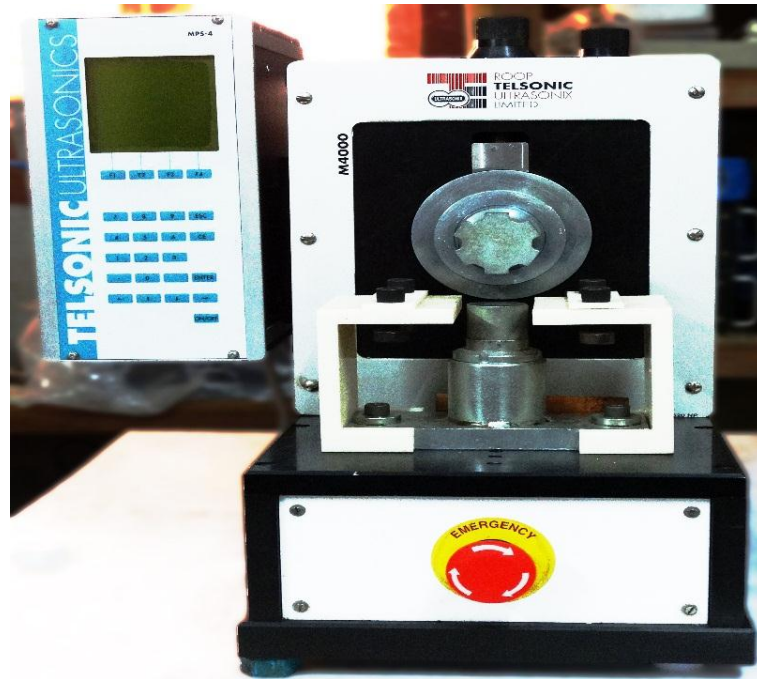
Telsonic M4000 Ultrasonic Metal Welder
